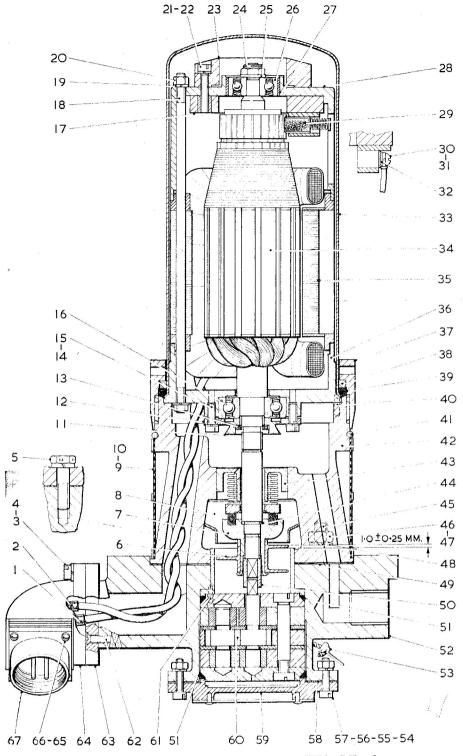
Sectional view, Fuel pump CHA. Mk. 4
